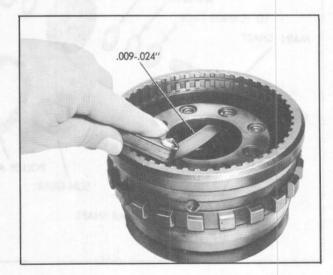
Removing Steel Speedometer Drive Gear Fig. 7-85 Checking Output Carrier Pinion End Play
